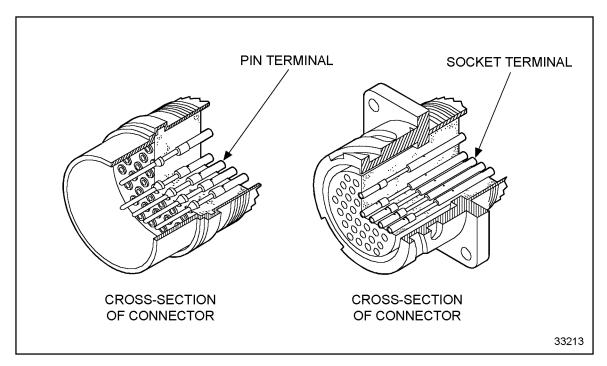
Connector Cross-section With Pin and Socket Terminals
